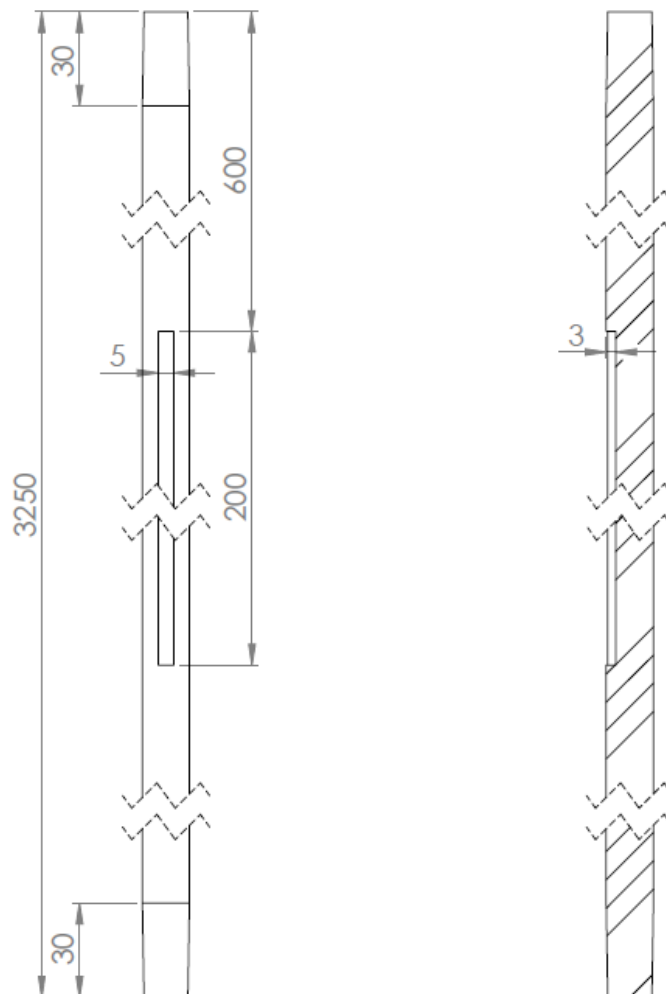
Detailed drawing of the rod prepared for surface mounted magnets
